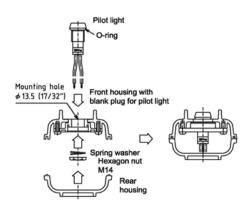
Cross-section view of Pilot Light Installation near Pushbuttons
